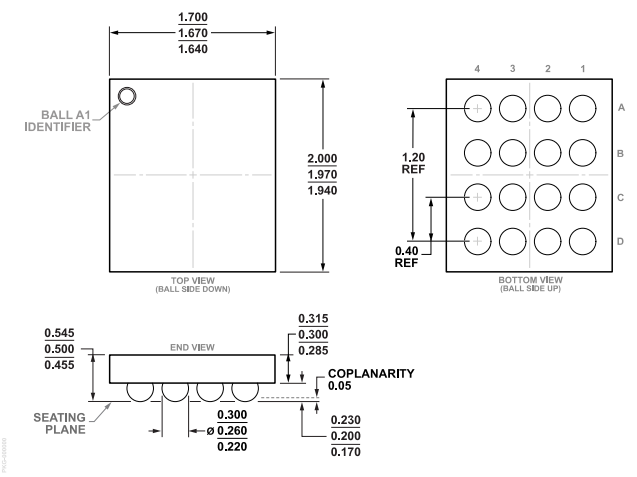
16-Ball Wafer Level Chip Scale Package [WLCSP]
